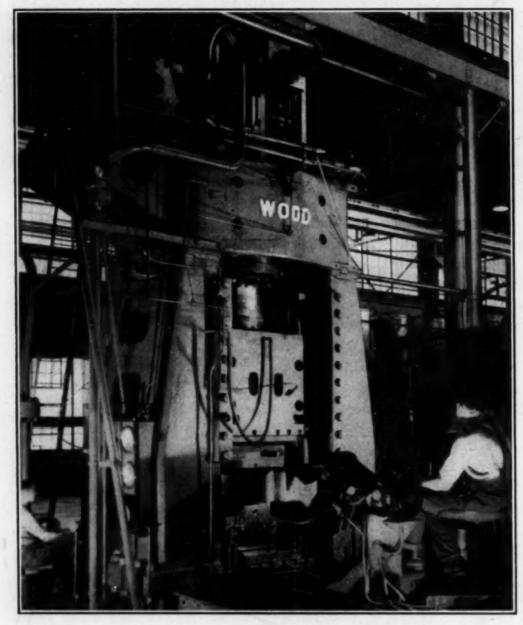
Ton Hydraulic Forging Press and Manipulator Engaged in Cogging an Aluminum Ingot.
